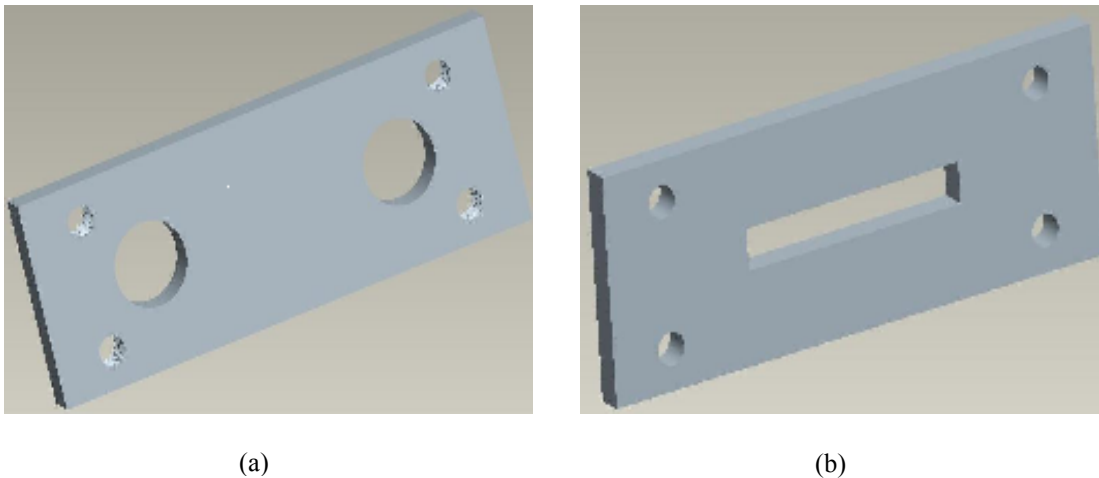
A Pro-Engineer drawing of the clamping mechanism which includes (a) a base plate and (b) a top plate
